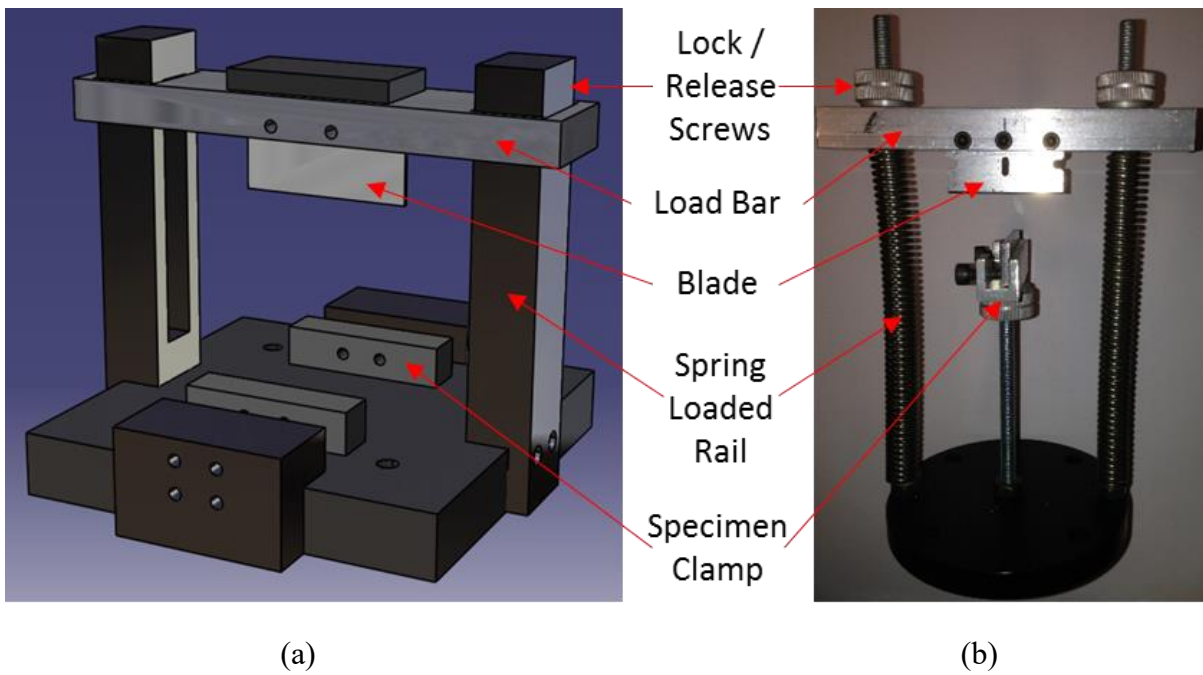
Design of the pre-crack rig (a) CAD model Type A, (b) prototype model
